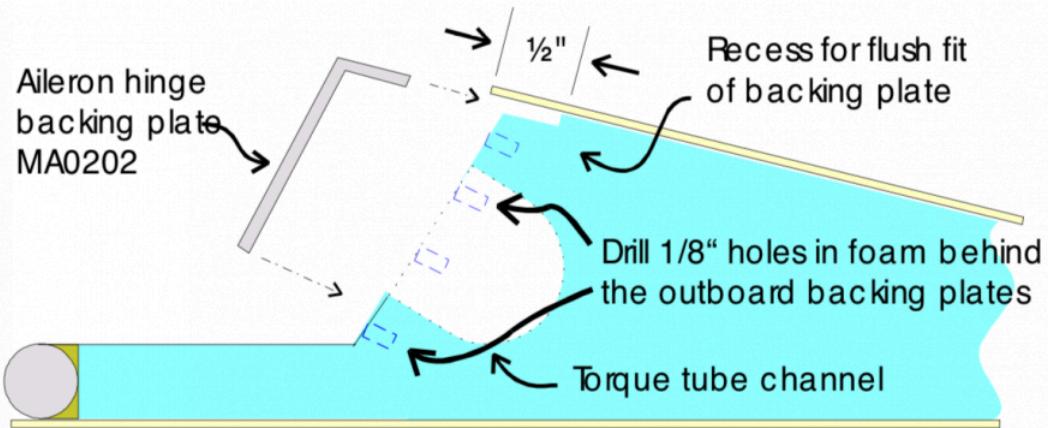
Hinge Backing Plate Installation - Cross Section
